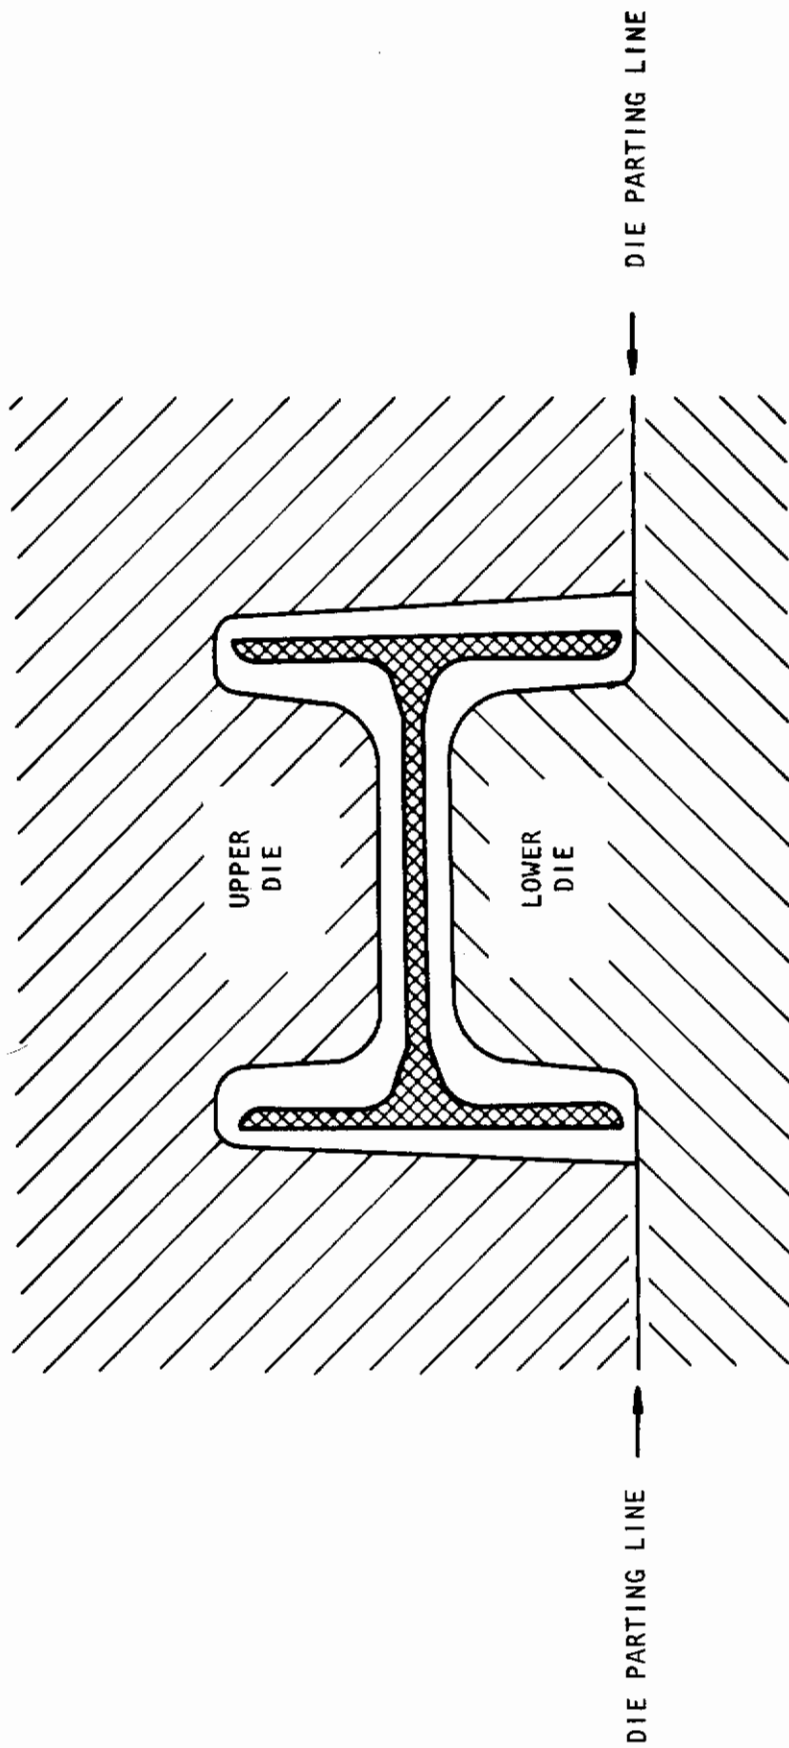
Schematic Illustration of Fin Rib Cross Section (at approximately mid-length) with Finish Forging Die Impression for 12,000 Pound Steam Drop Hammer Superimposed to Target Closure. Approximately Full Scale. Similar, Less Detailed Blocker Die Impressions for Prior Operations were Employed Inverted in Comparison to the Above Orientation. Also, Initial Forging Trials Employed the Finish Impression Inverted Relative to the Above - See Text.
